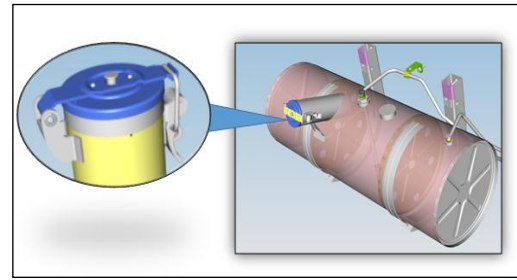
Traditional Fuel Tank & Cap Locking Mechanism
